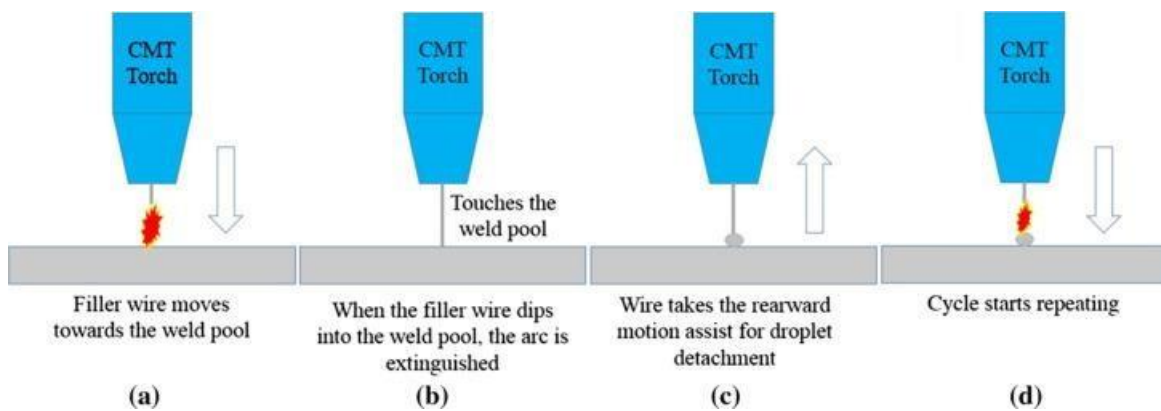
Gas Metal Arc Welding (GMAW)[72]
